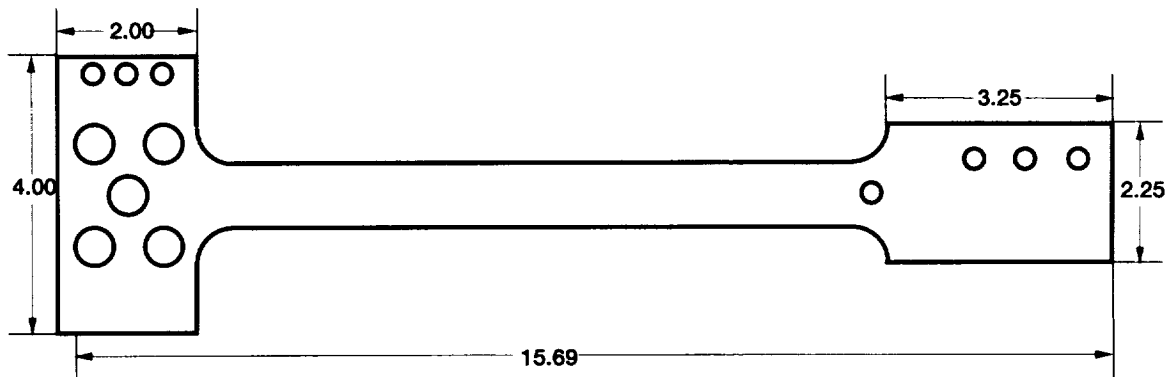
Dryden constant-cross-section, cantilevered-beam load bar used for GWP29 gage factor tests. (Dimensions are in inches.)
